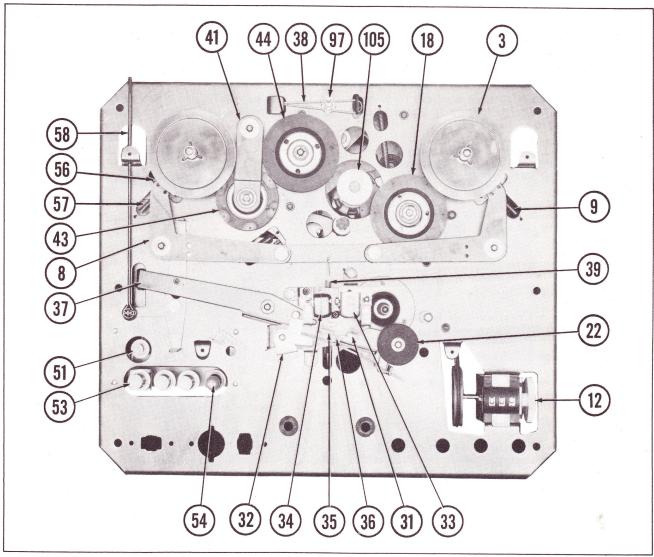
TOP VIEW OF MECHANISM WITH TOP PLATE REMOVED
